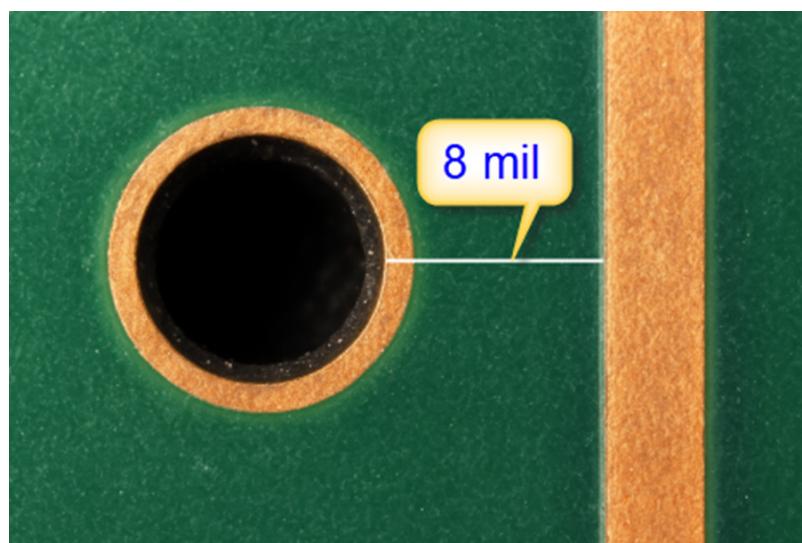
Example of 8-mil hole-to-trace spacing, illustrating recommended minimum clearance between a plated through-hole and adjacent copper to support standard PCB fabrication yields.
